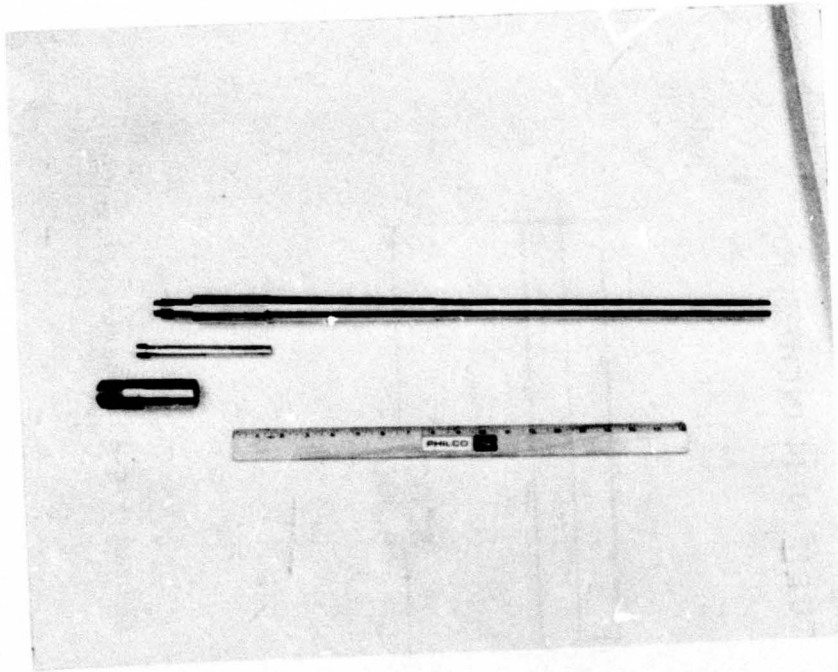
220 Swift/M-60 Barrel Components Prior to Assembly by Shrink Fitting
